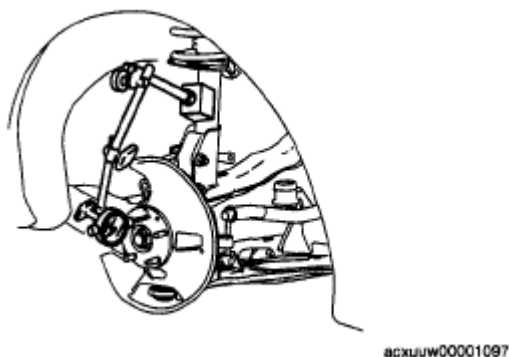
Measuring Wheel Bearing Axial Excessive Play
